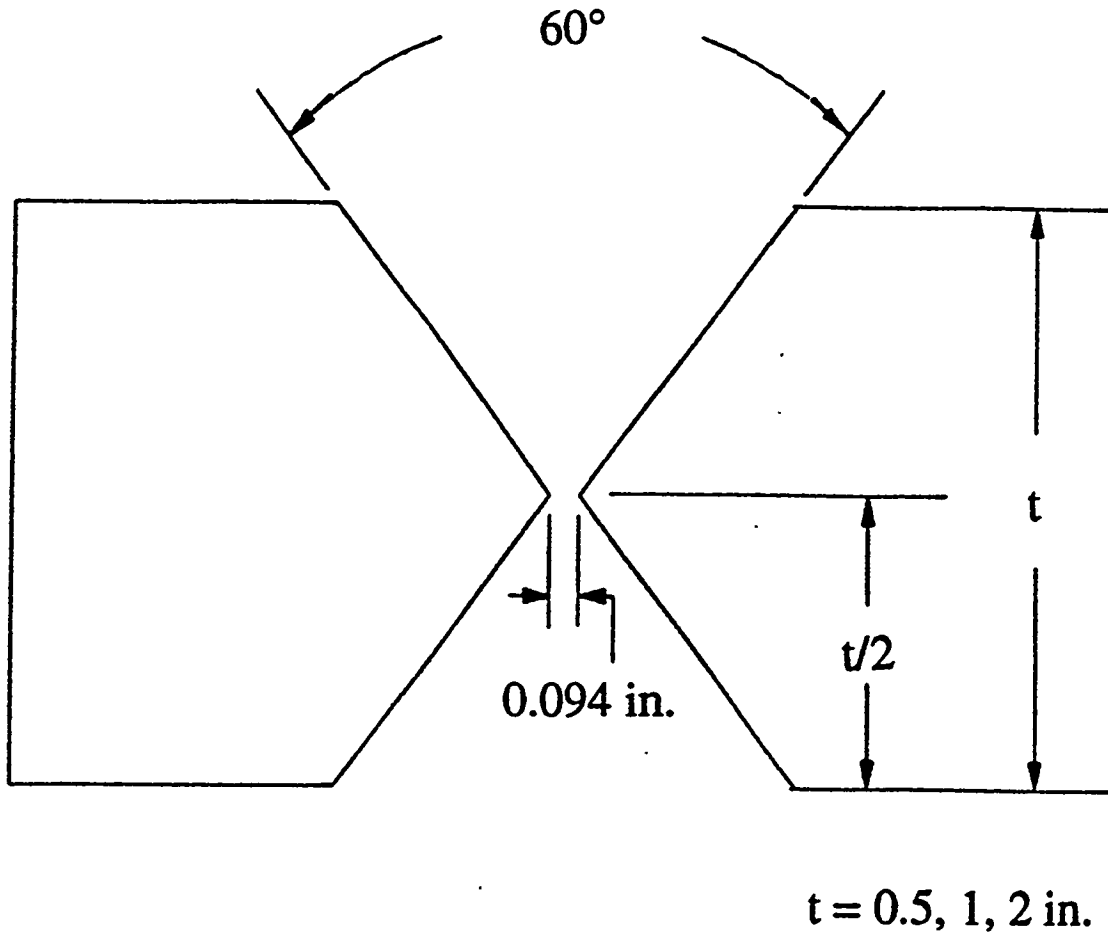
Joint geometry for FAPY cast slab welds.
